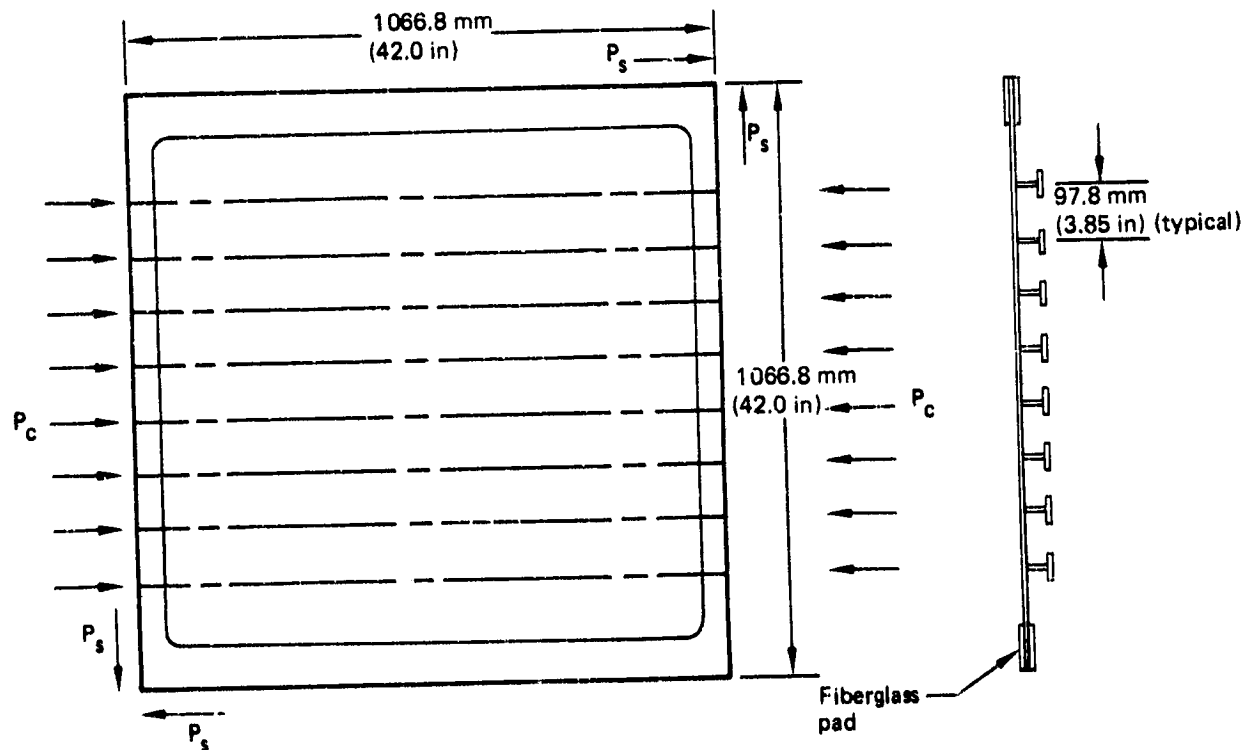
Shear/Compression Panel, (Specimens 65C17773-42, -43)
